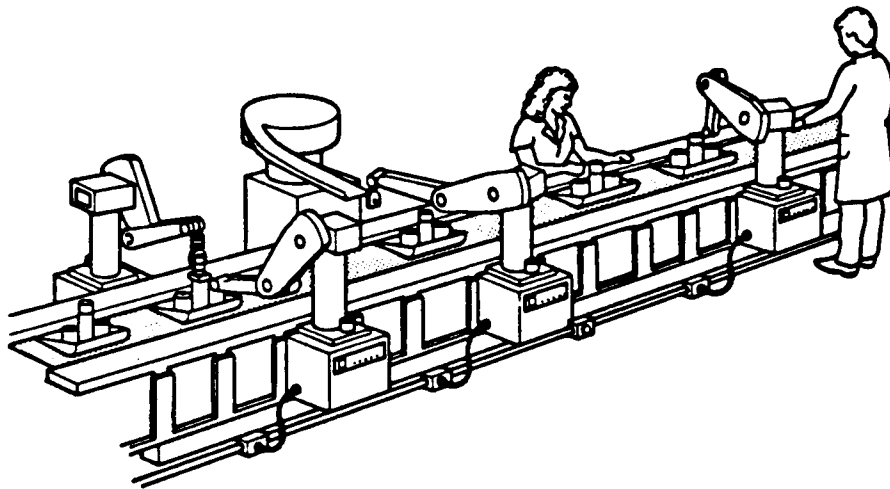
Possible arrangement for an adoptable programming assembly system using robots.
